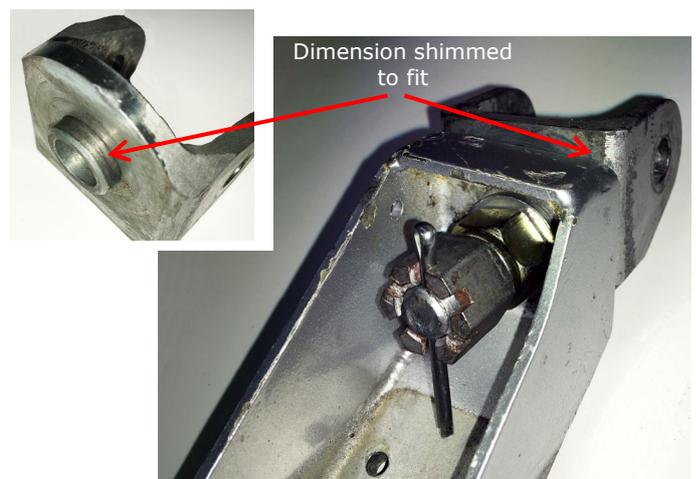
A picture of the three-dimensional swivel: Note that the designer requires this bolt to be secured with a nyloc nut and a split-pinned castle nut. When fitting the later bushes, it is essential that this joint is accurately shimmed during assembly to remove any angular play, but remains free to rotate.
